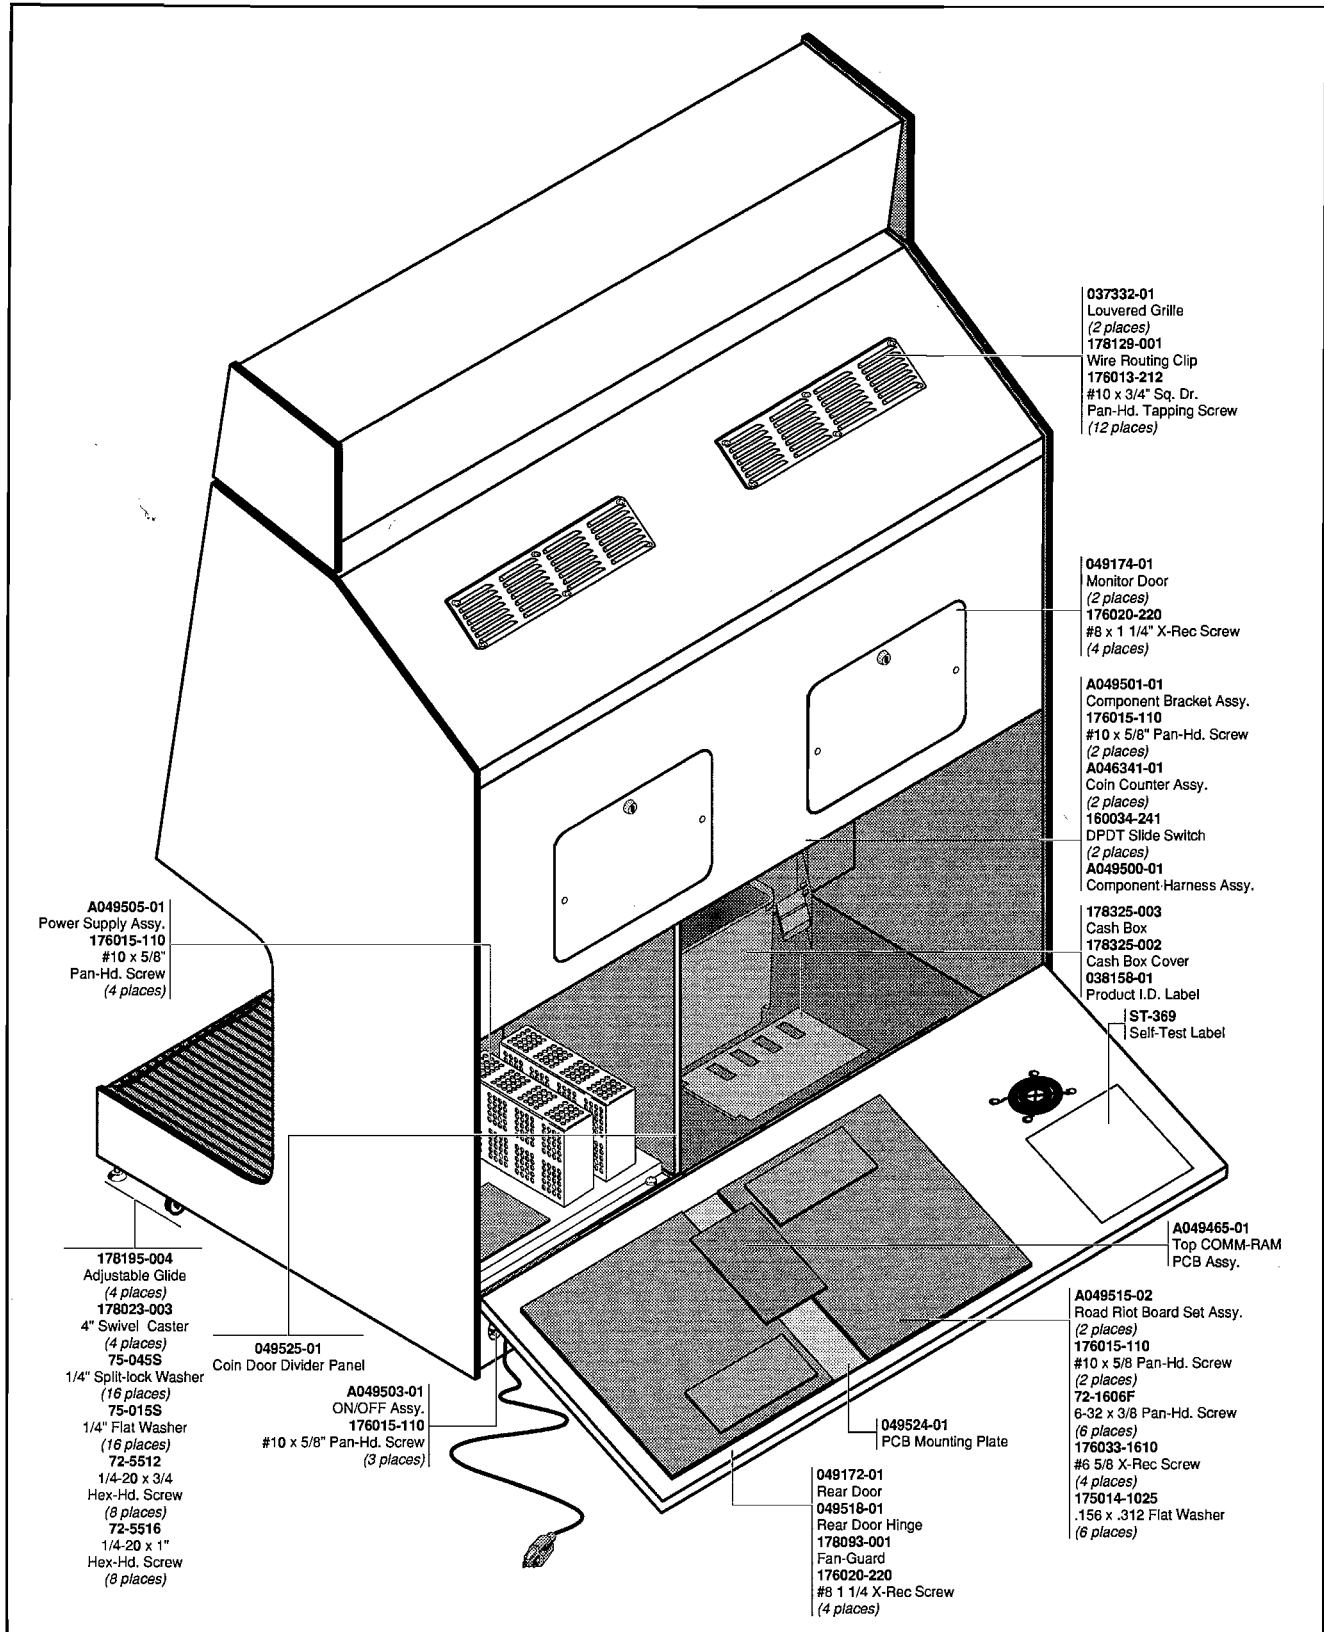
Cabinet-Mounted Assemblies, Rear View
